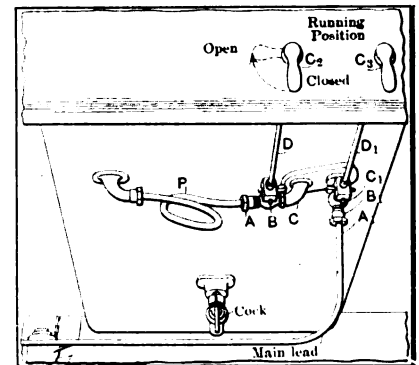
Illustrating the fittings placed under a gas-oline tank
